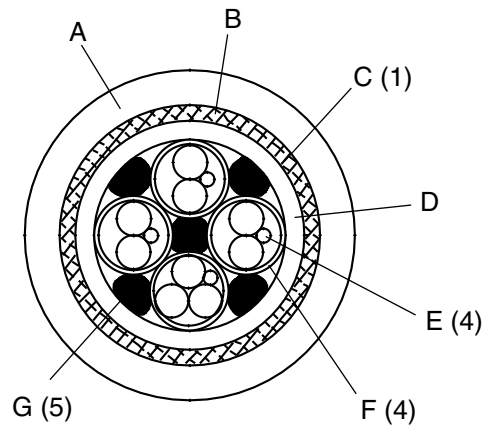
through 4-11 provide detailed cross-section views of the different cable types.
